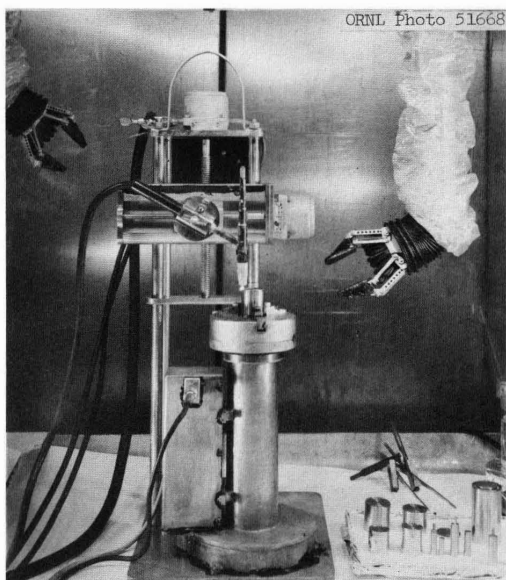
In-cell, open-atmosphere equipment for gas tungsten-arc welding.
